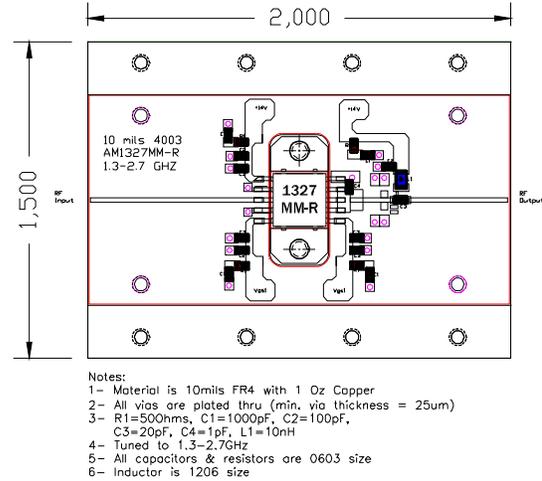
Off-chip output matching circuit on PCB (10-mil thick, FR4 PCB)
